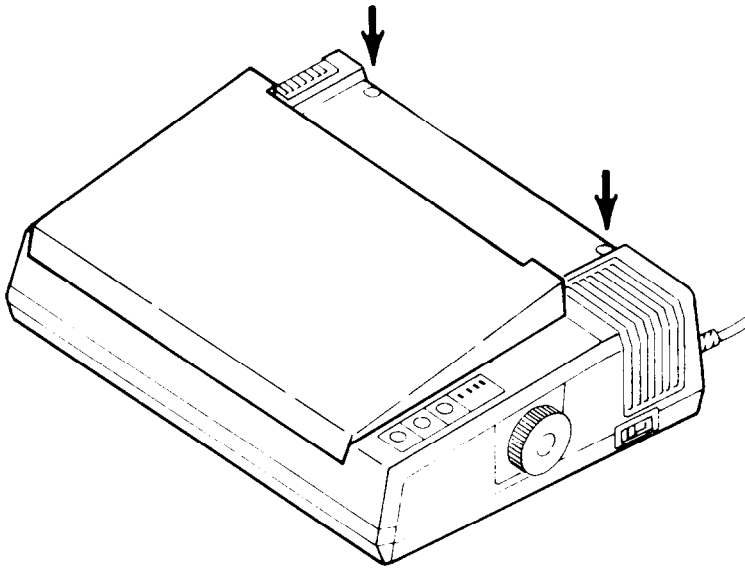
Two mounting screws hold the upper casing in place on the Gemini-10X.
